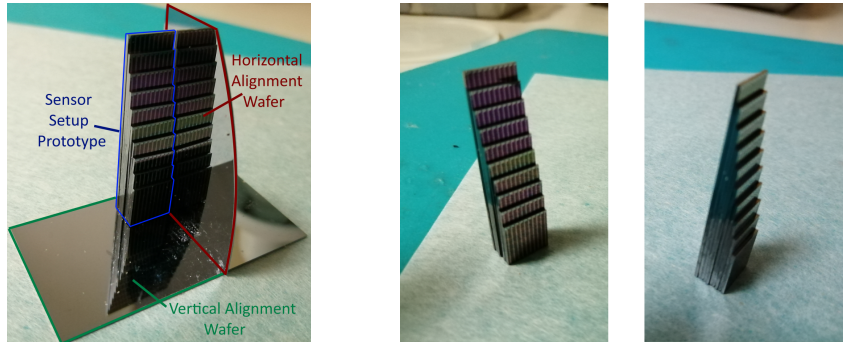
Manual Assembly Method (Left) and Result (Right) of the Electrical Prototype Setup
